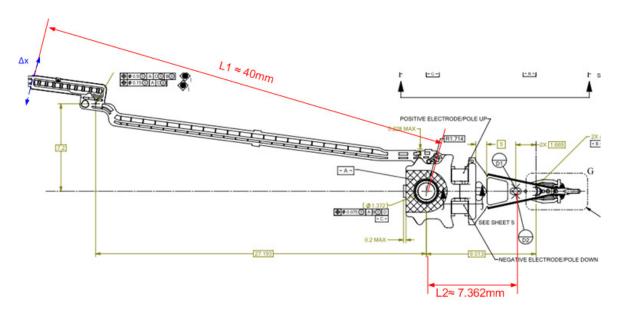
Outline Dimensions of HGA GrenadaBP2
